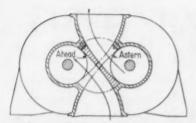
A vane-type reversing valve can be fitted in the end casing
